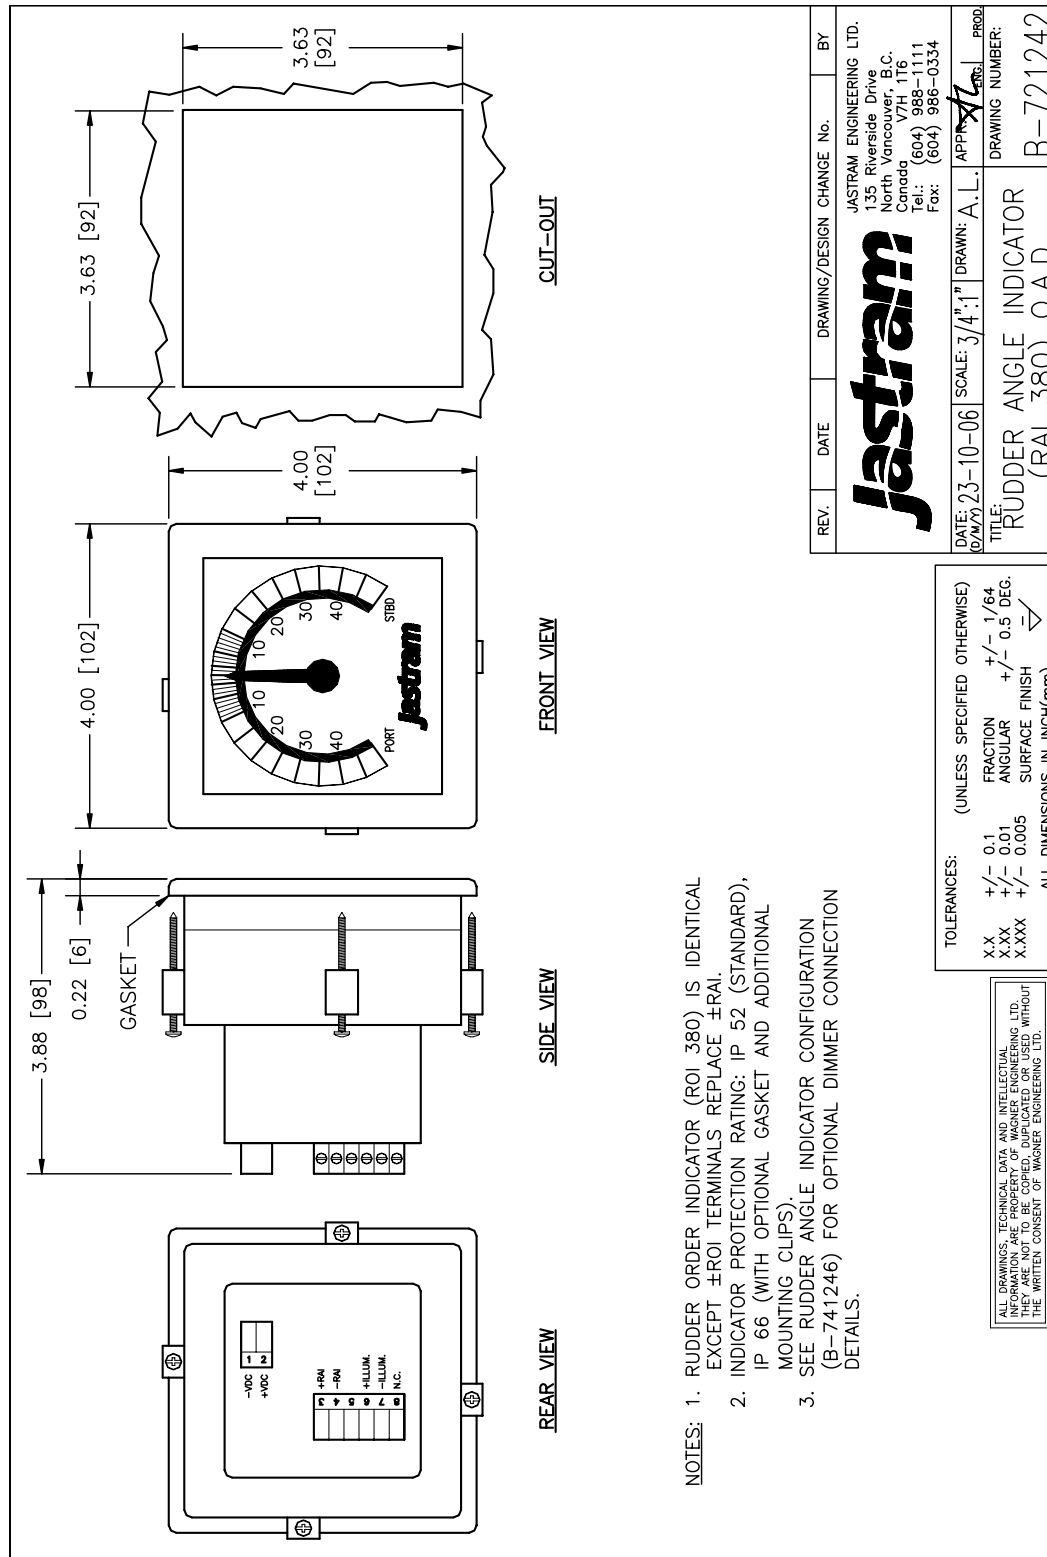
RUDDER ANGLE INDICATOR (RAI 280) OVERALL DIMENSIONS
